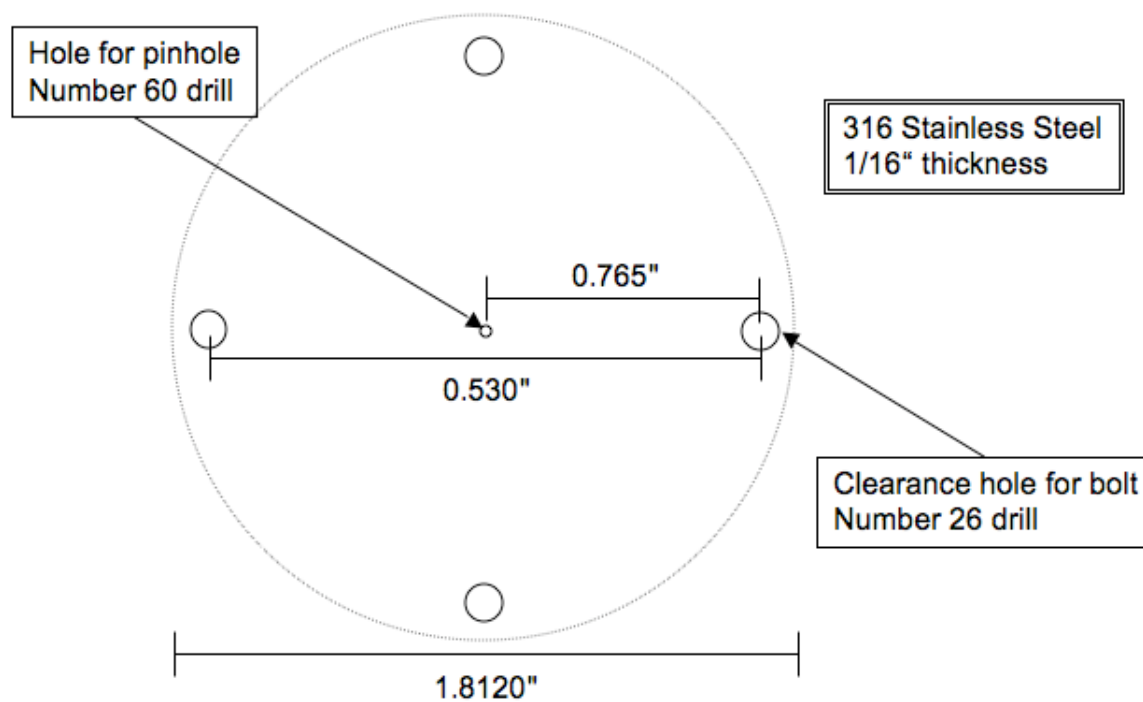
Pinhole plate to be mounted on high-pressure side of the pinhole flange.
